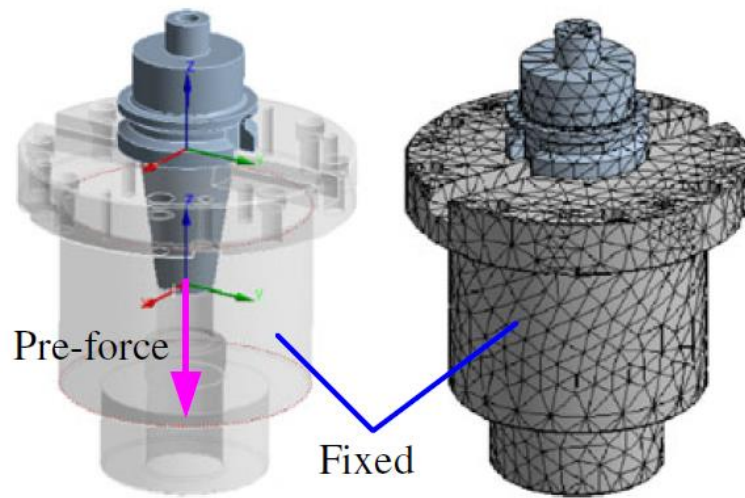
Dynamic modeling of a spindle–holder assembly [5]
